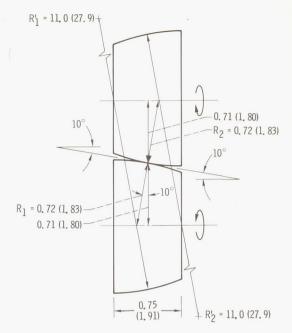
Contacting disk geometry. (All linear dimensions are in inches (cm).)
